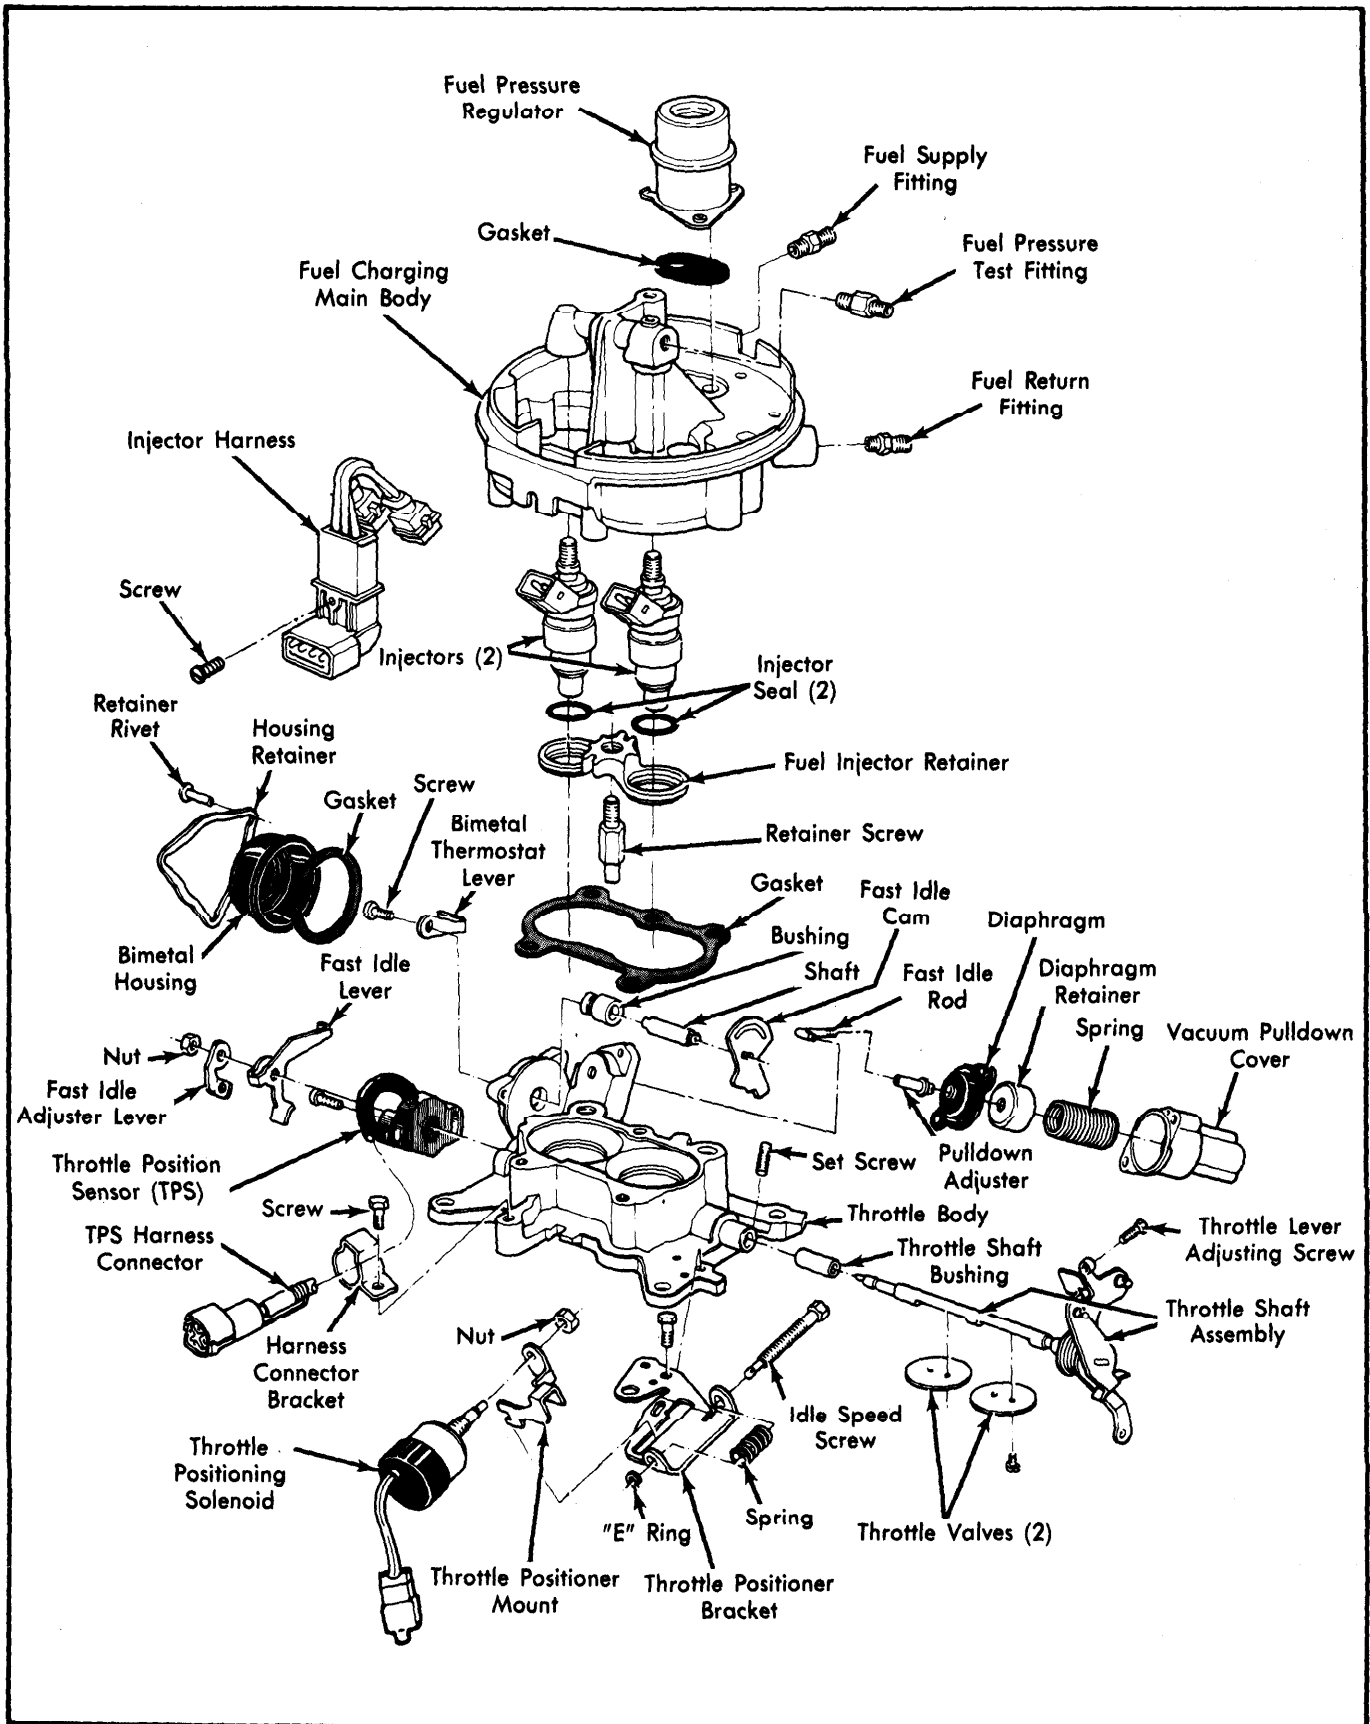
Exploded View of Throttle Body and Fuel Charging Assembly
